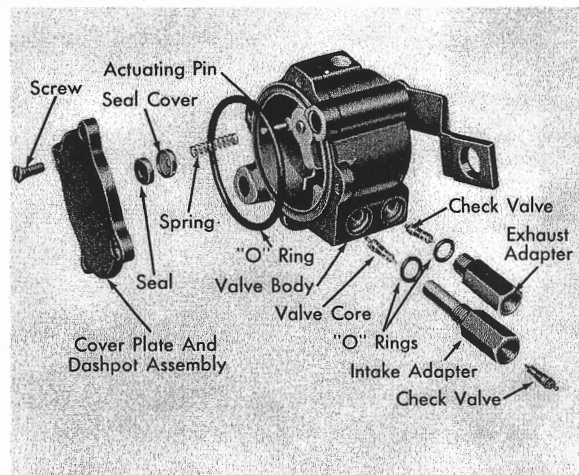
LEVELING VALVE - DISASSEMBLED
